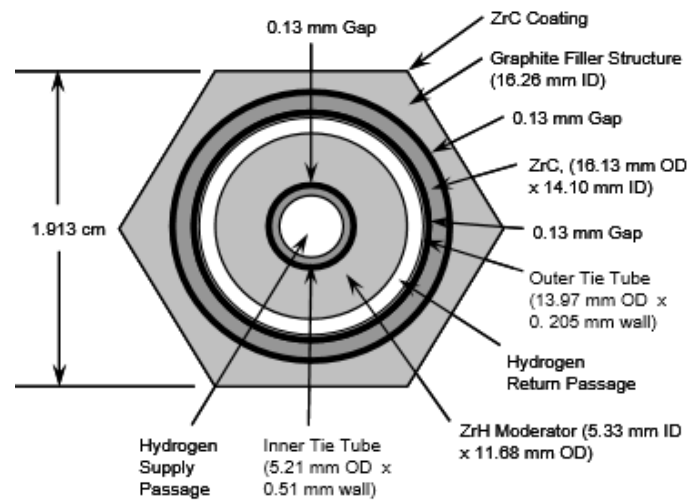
Tie rod tube top view (Fittje & Schnitzler, 2008)
